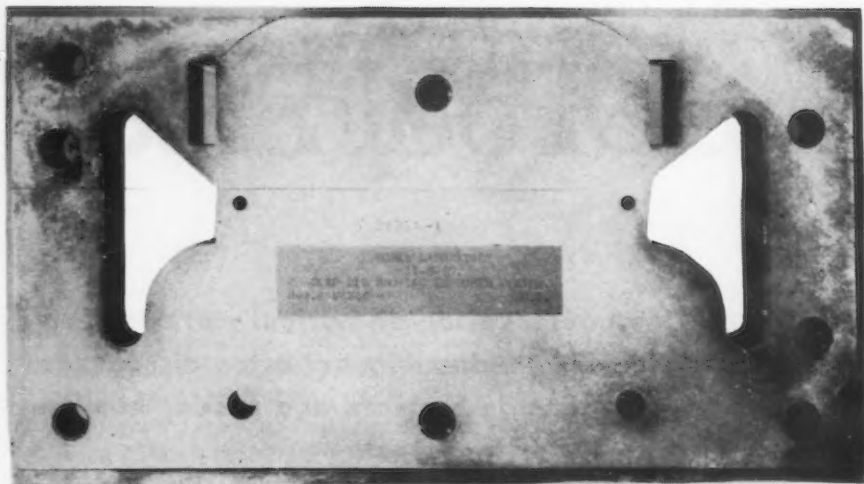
Quenching cracks in a die. The poor design of the die resulted in uneven cooling.
